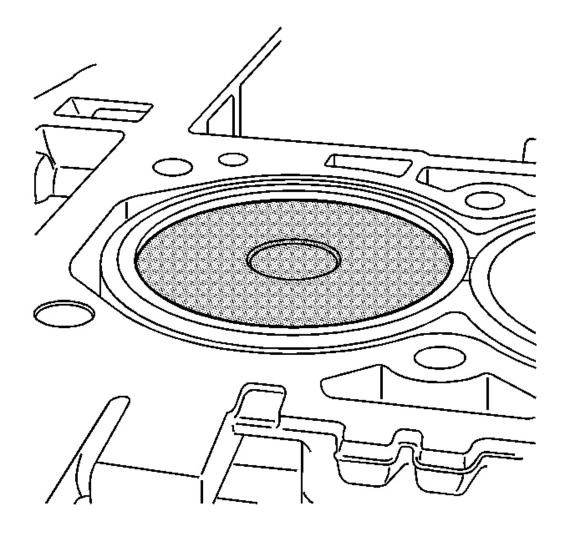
Identifying Catch Plug Positioning Courtesy of GENERAL MOTORS CORP.
